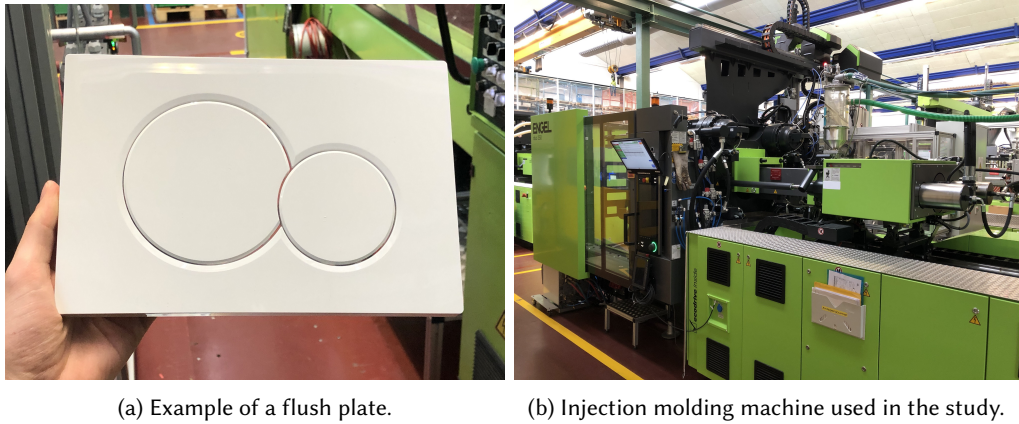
Finished product (a) and industrial machine to produce the main components (b).
